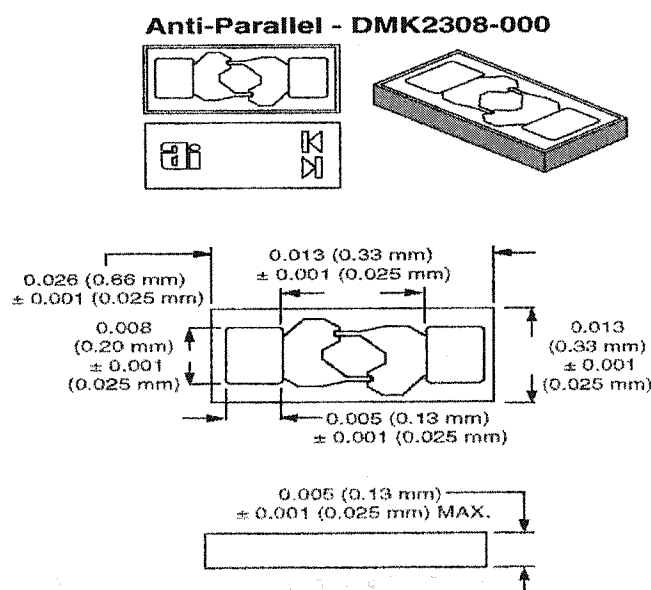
ALPHA DMK2308-000 packaging outline dimensions.
